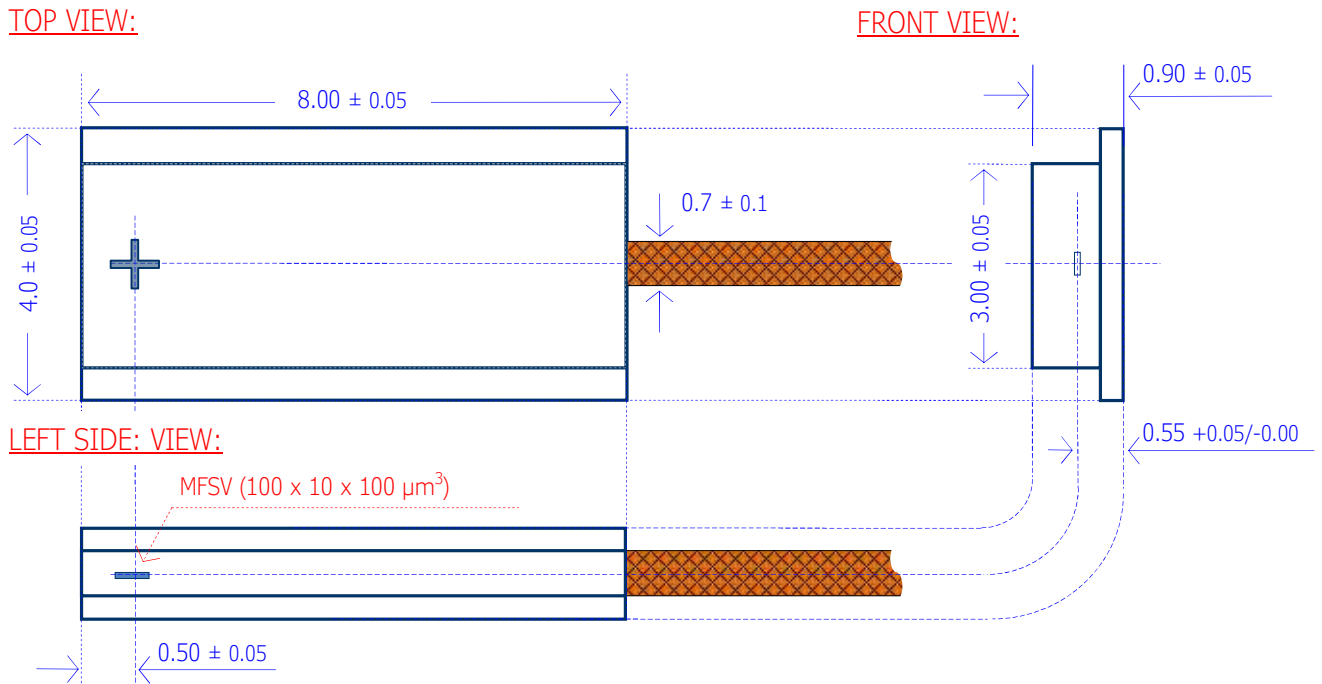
Dimensions of the I3C-03CxxL Hall Probe and Cable (Module H).
